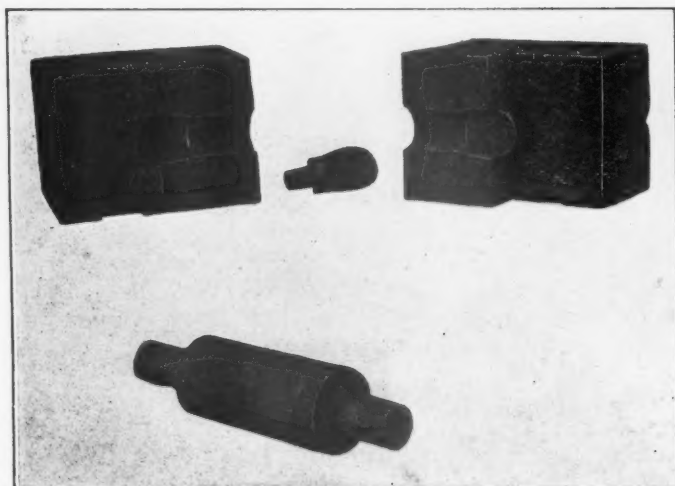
DIES AND HEADER FOR FORGING SLING STAY I-BOLT.
